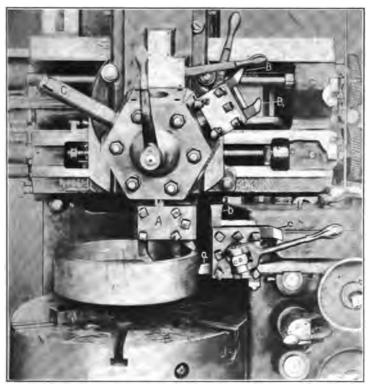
Turning Gasoline Engine Flywheel on Vertical Turret Lathe—First Position
